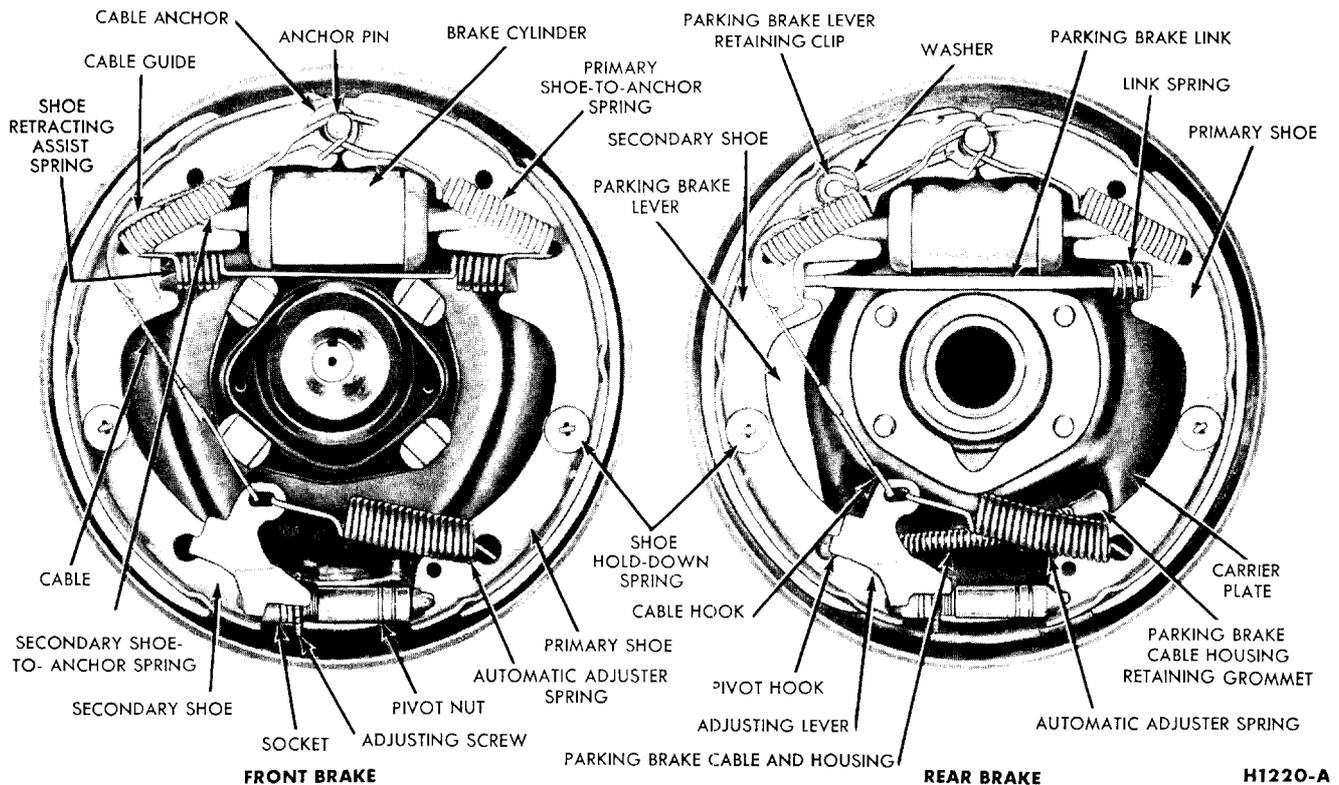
Self Adjusting Brake Assemblies—All Fairlane & Falcon, Comet & Mustang—8-Cylinder Cars
